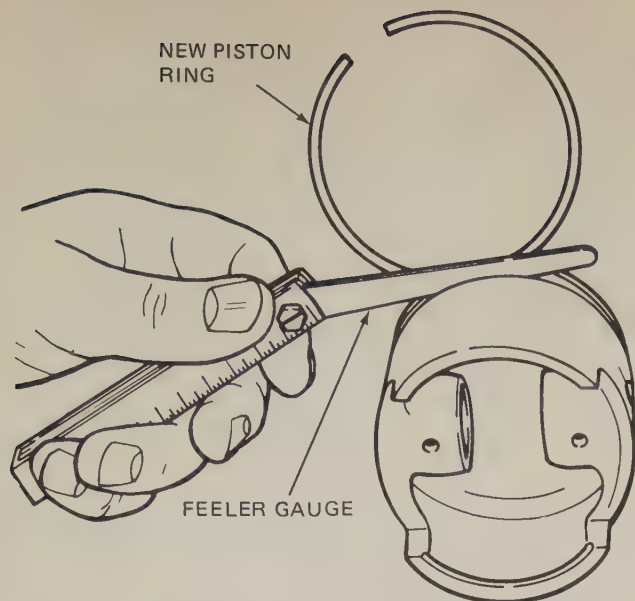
Checking the side clearance of the piston ring in its groove. (Kohler Company)
